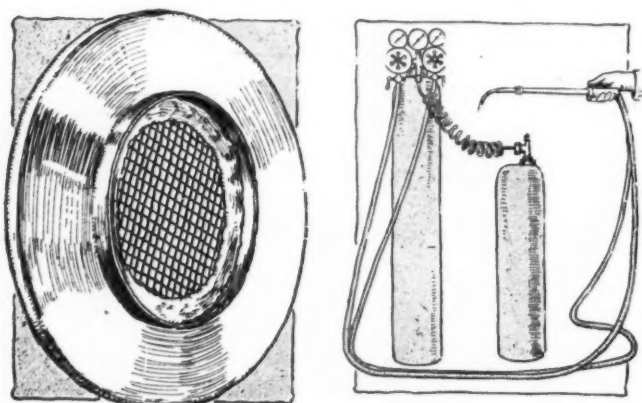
Gasosava. Fig. 8—Jahnke welding outfit
